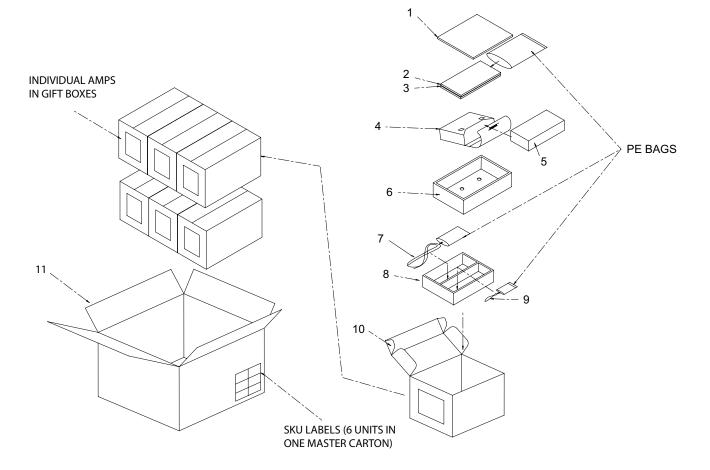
PackLite<sup>™</sup> A1 Amplifier Assembly Packaging View
